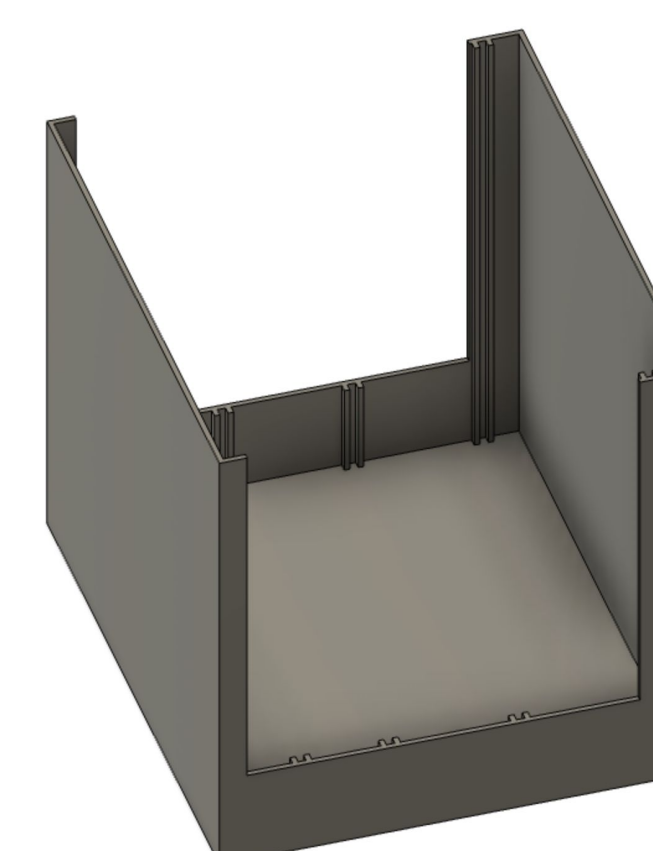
New 3D printed box for all the SBCs and PCBs except PAA board.
